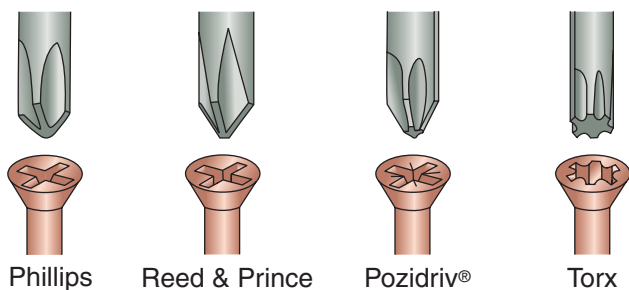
These screw head shapes are used in many applications on power equipment engines.
